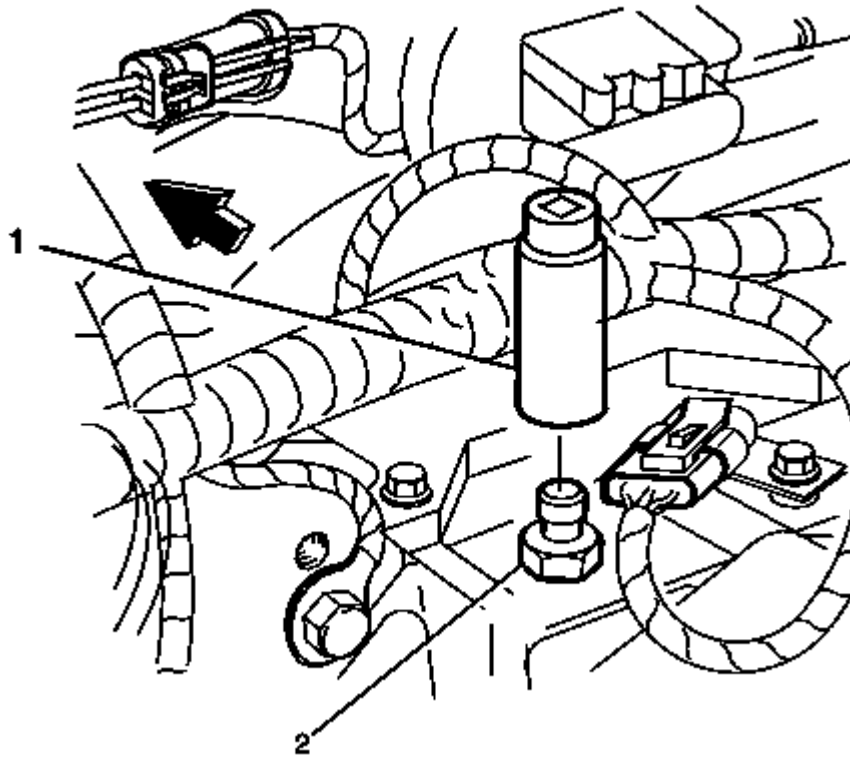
Identifying Oil Pressure Sensor & J 41712
